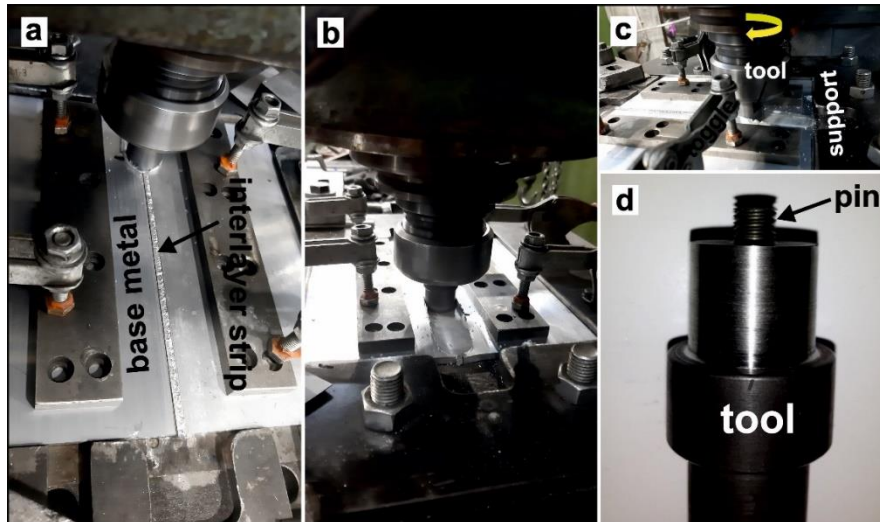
The FSW experimental layout (a,b,c) and tool configuration (d)
